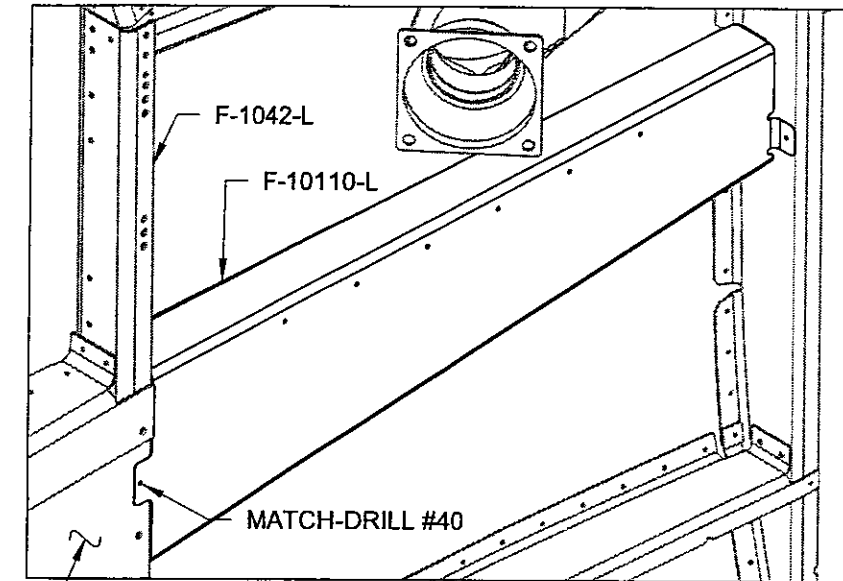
MATCH-DRILLING THE WIRE COVER, MID CABIN SIDE COVER AND BULKHEAD SIDE CHANNEL
